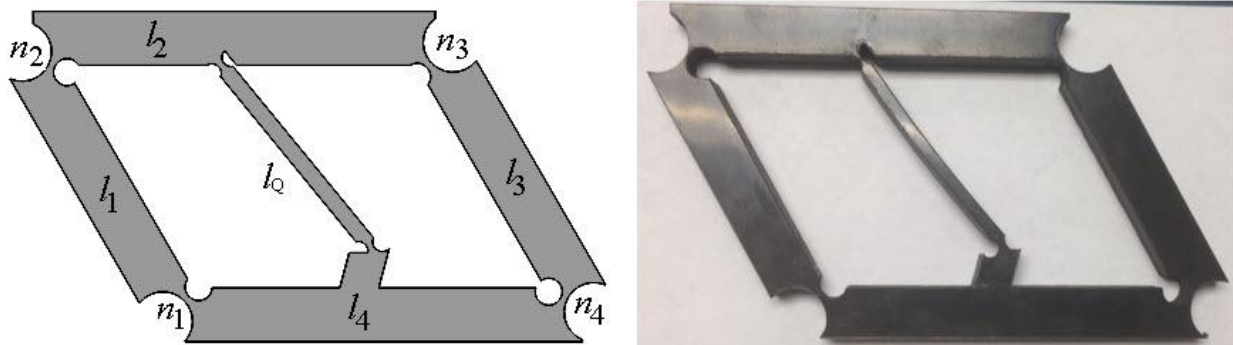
The final designed mechanism (Left) Solidworks, (Right) Prototype.
